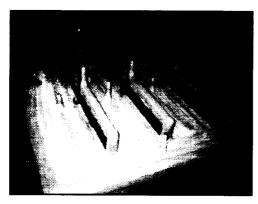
Reusable vacuum bag for VARTM of 3-stringer panel.
